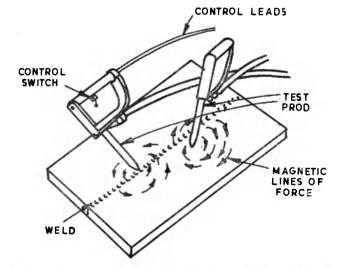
Creation of magnetic field around a weld with the passage of current through the weld between two test prods.
